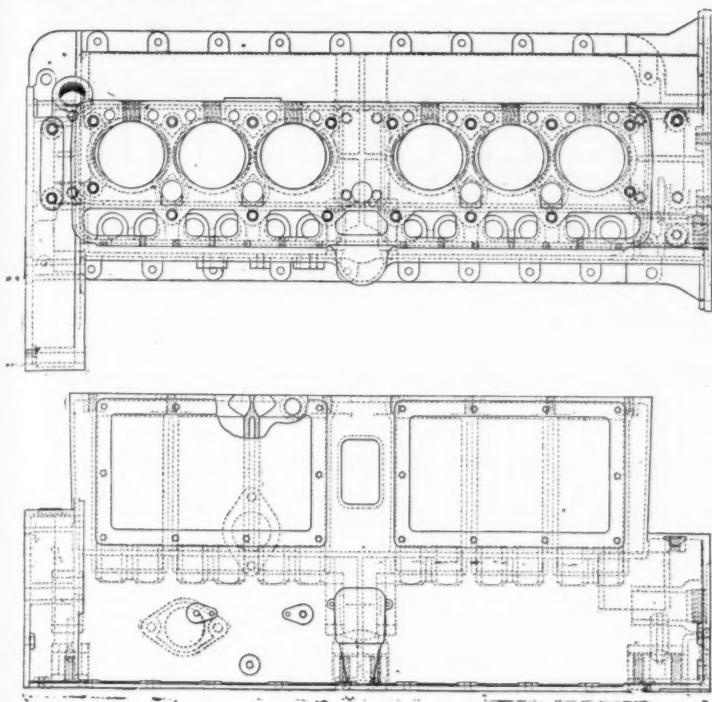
(right) — Crankcase used on Jordan Continental engine. Note that the case is divided well below the center line of the main bearings
